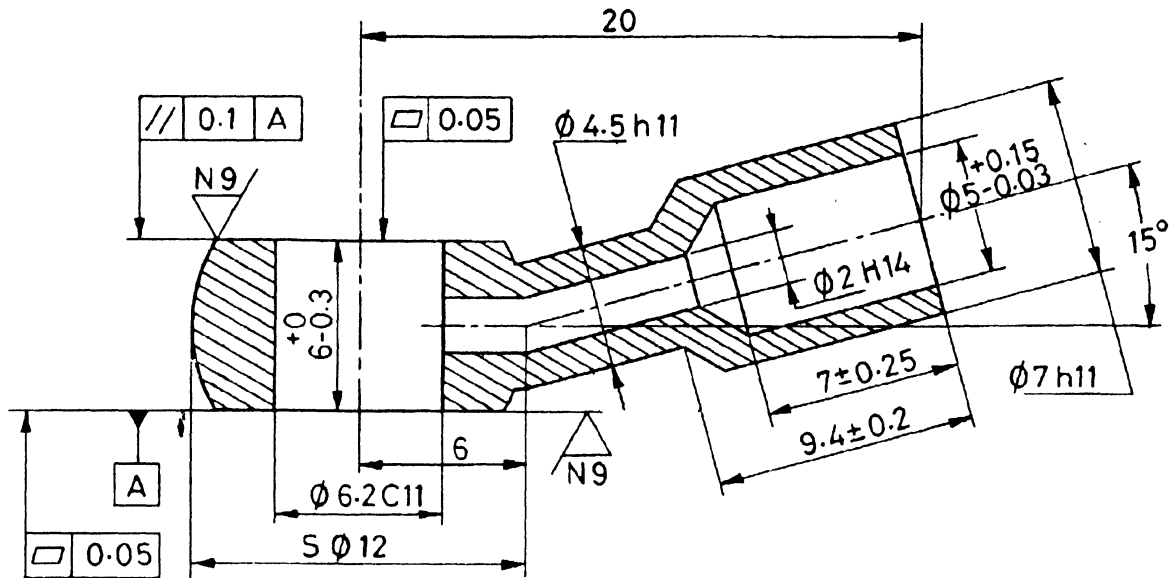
DIMENSIONS AND TOLERANCES OF BENT TYPE SINGLE ENDED PIPE UNION
